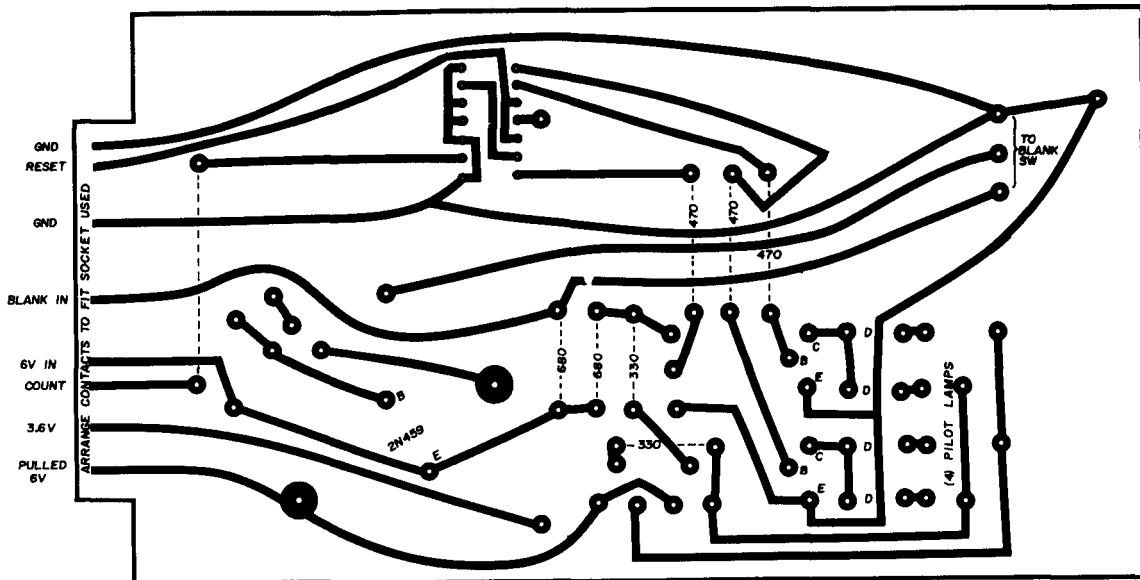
Printed circuit board for the left-hand counter and lamp blanking circuit.
